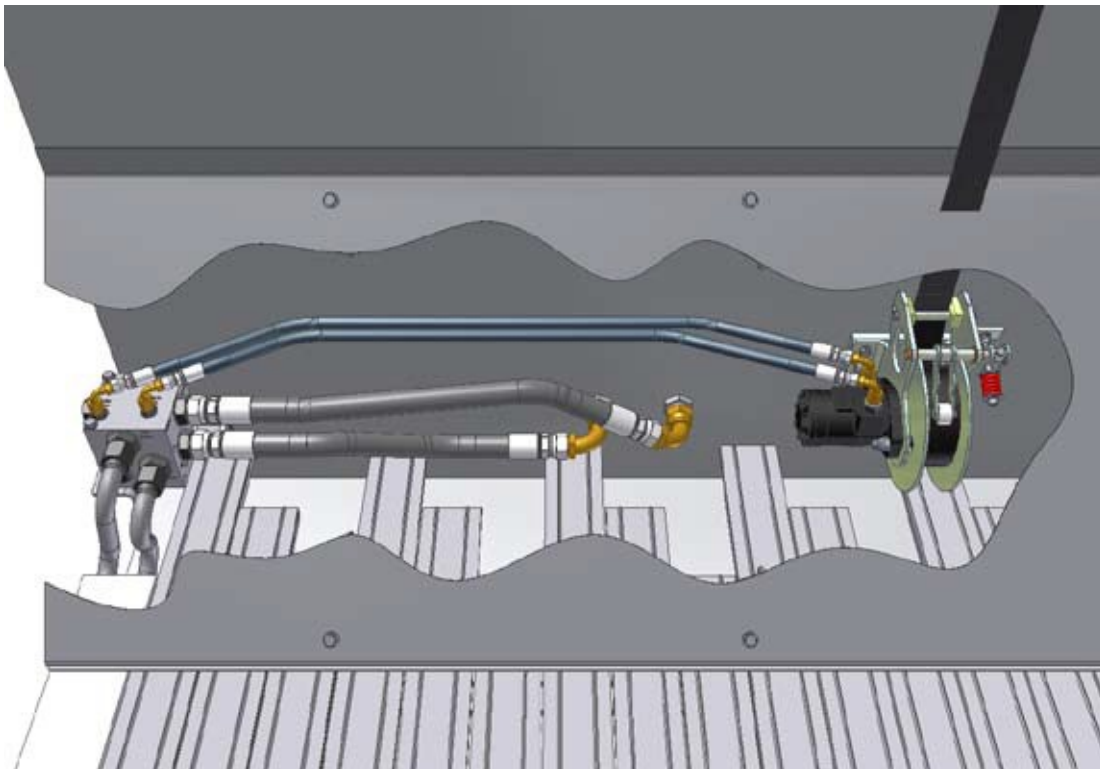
Winch and manifold mounted below the front shield (low-mount).
